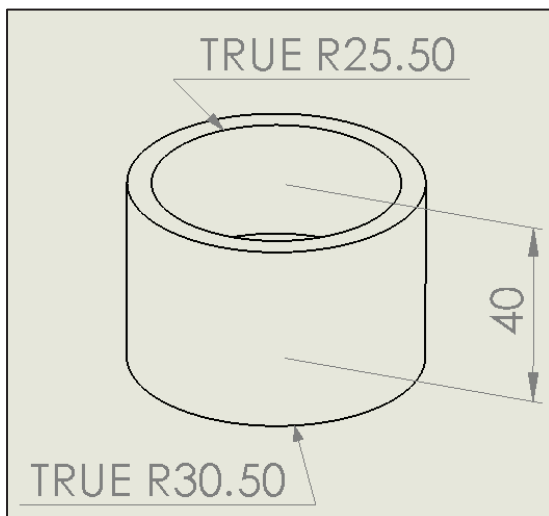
Technical drawing of new CBR mould using Solidworks (dimensions in mm)
